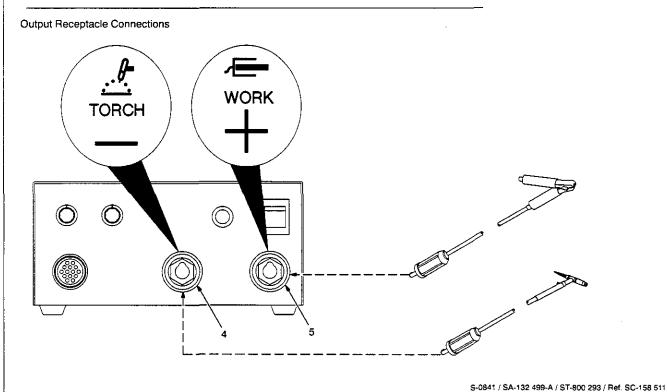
Weld Input And Output Receptacle Connections
